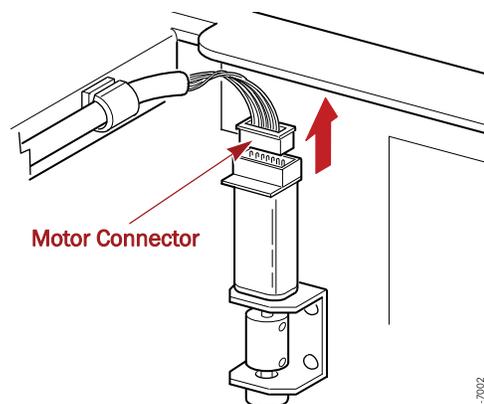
Remove Front Z-Axis Motor Cable (Inside View)
